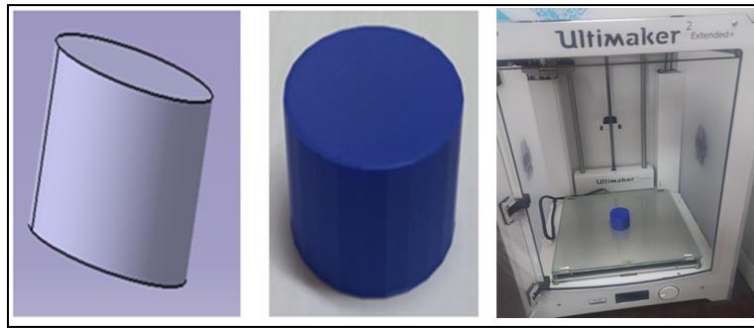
Test part manufactured and FDM machine Ultimaker used
